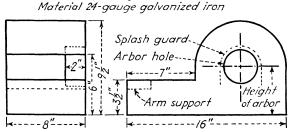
Detail drawing of the splash pans shown in Fig. 140. Dimensions may be changed to make pan fit your arbor.
